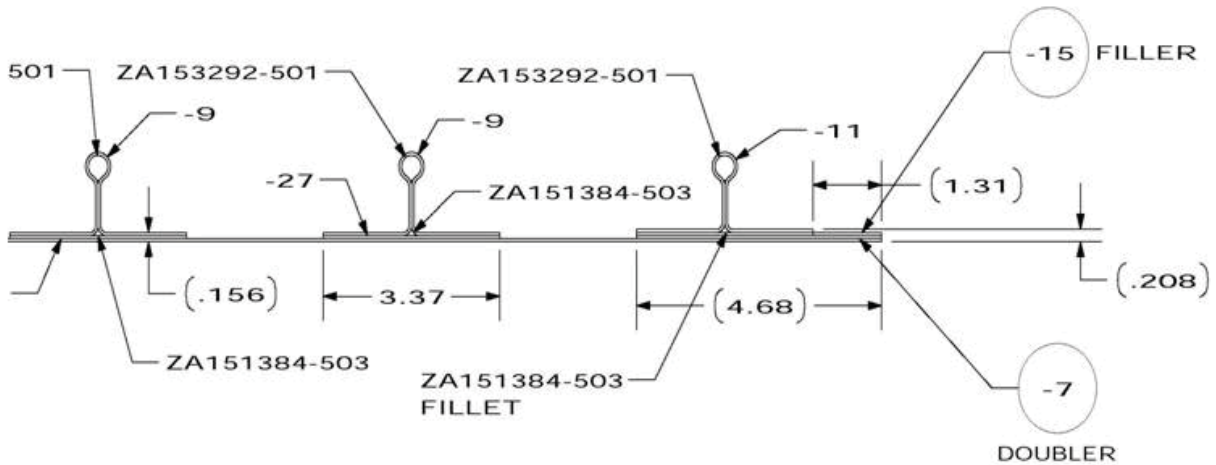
NOMINAL PANEL EDGE GEOMETRY
